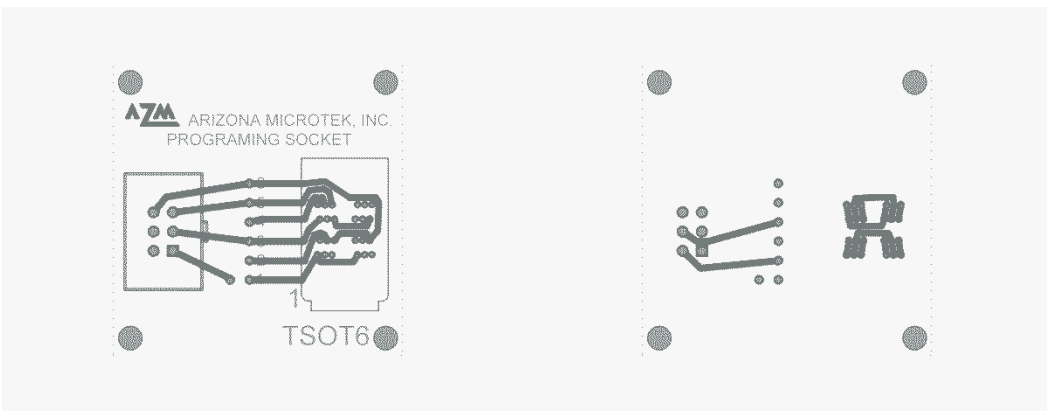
TSOT6 Programming Socket Adapter Board (Top & Bottom View)
